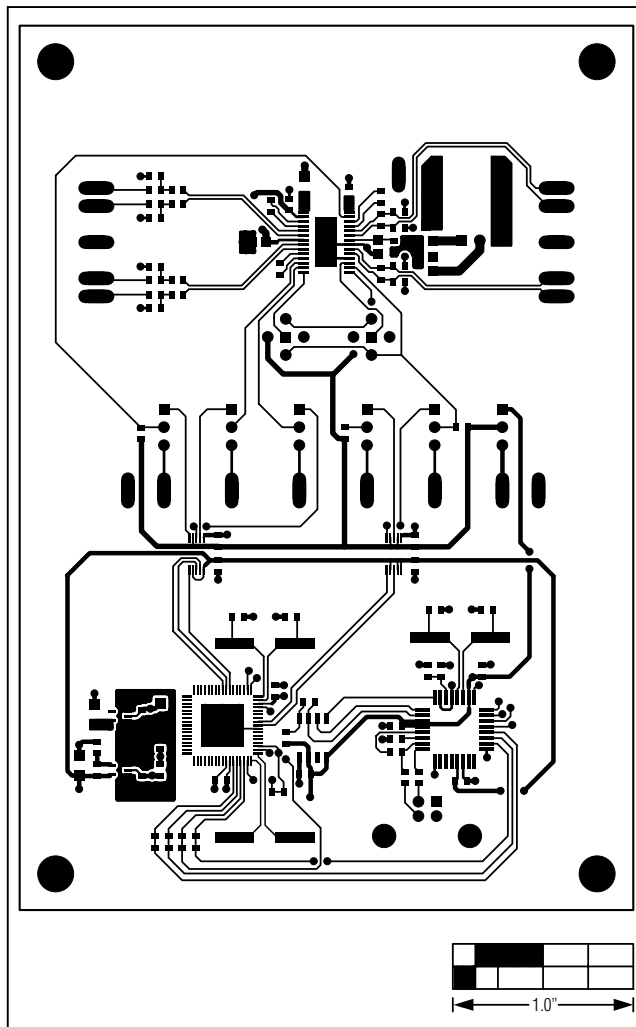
MAX13325 EV Kit PCB Layout—Component Side
